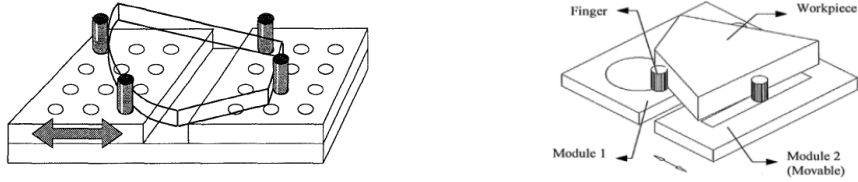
a) Hole pattern modular fixture with movable jaws [14] , b) Three-fingered modular fixture [18]
